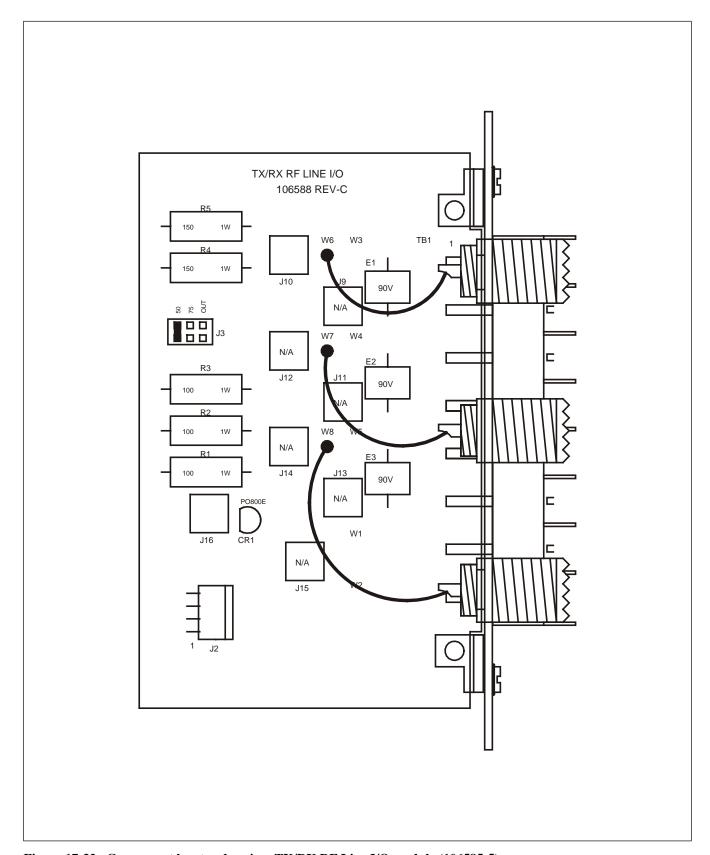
Component locator drawing, TX/RX RF Line I/O module (106585-5)
